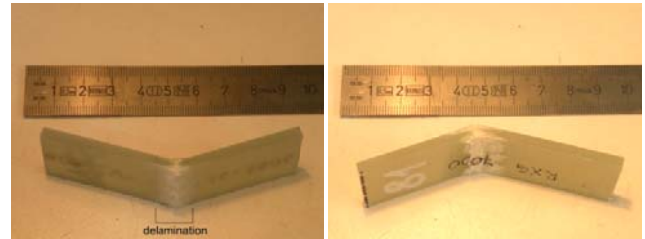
Example of nano-clay RXG7000 modified matrix specimen after fatigue failure
